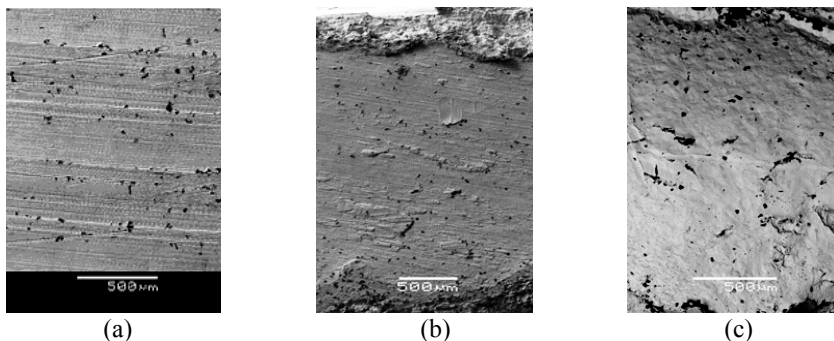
Crack surface appearance along the weld: crack initiation points, chevron marks and ratchet lines and the horizontal transition line weld bead-HAZ
